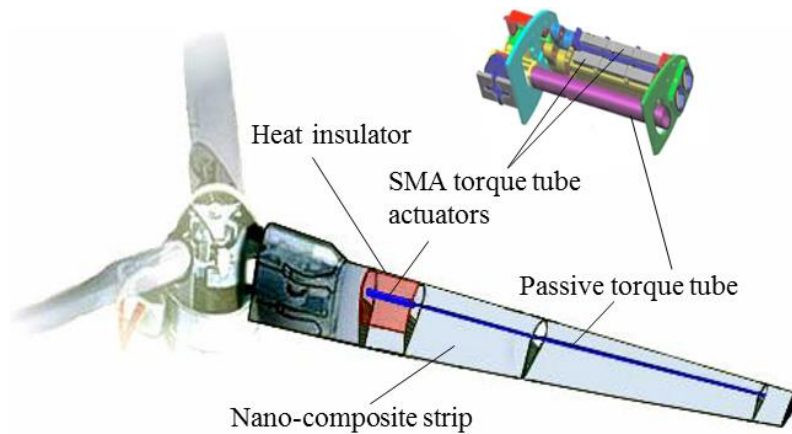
Active rotor blade using NiTi SMA torque tube (Arbogast et al., 2008)
